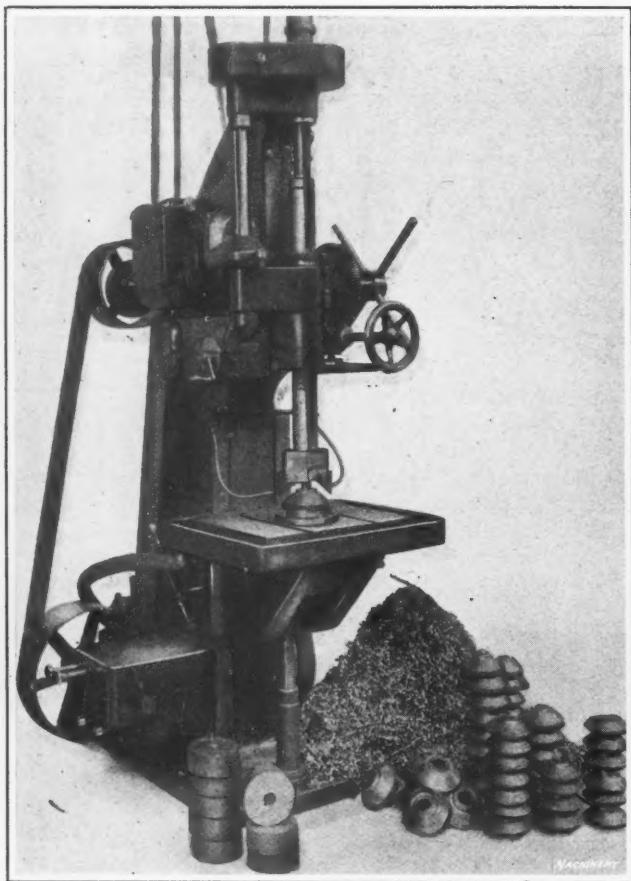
Baker Bros. High-duty Drilling Machine tooling up for performing Forming Operation on Bevel Gear Blanks
